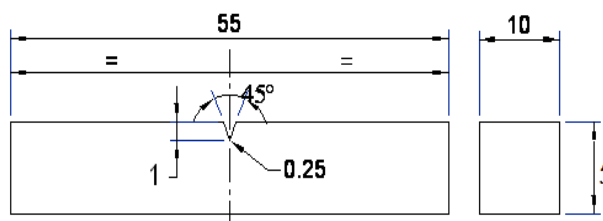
Dimensions of the impact test specimens with tolerances [ASTM E 23]
